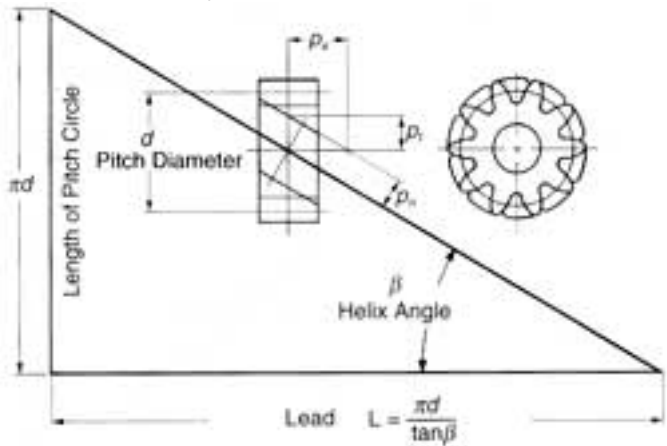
Fundamental Relationship of a Helical Gear (Right-Hand)
